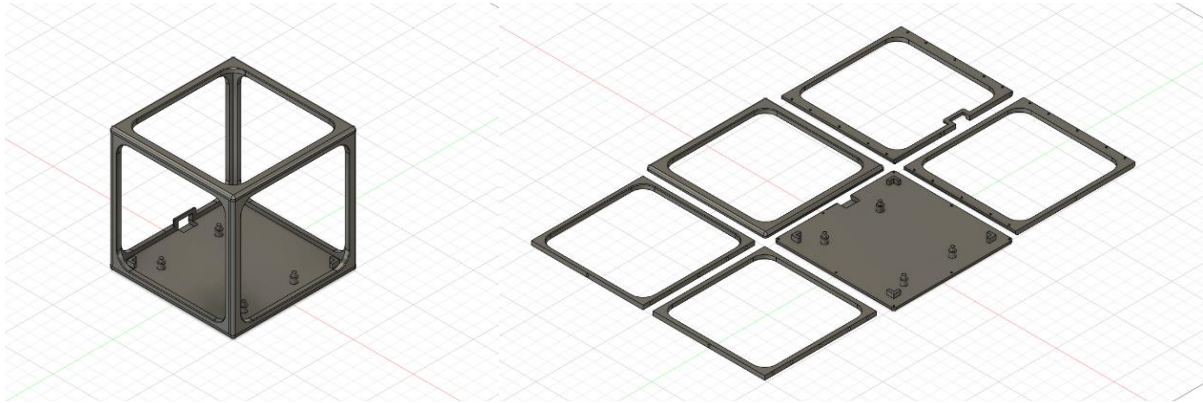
A 3D model of the devices casing drawn in Fusion 360. It can be assembled and disassembled using locating pins and holes at each connection point.
